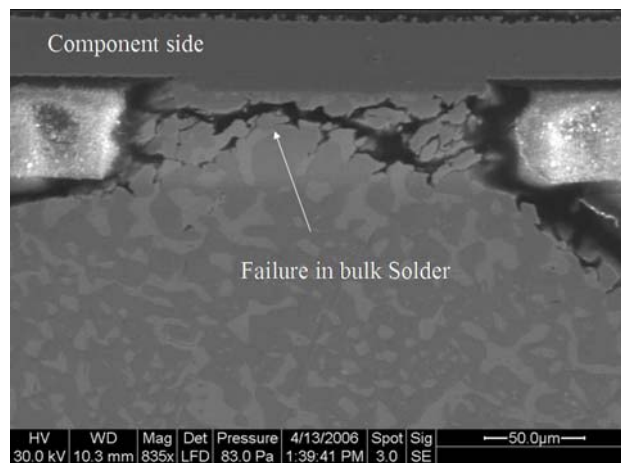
Failure was found on the component side for BGA (SnPb) assembled with SnPb solder on HASL(SnPb) pad finish, not repaired, not aged
